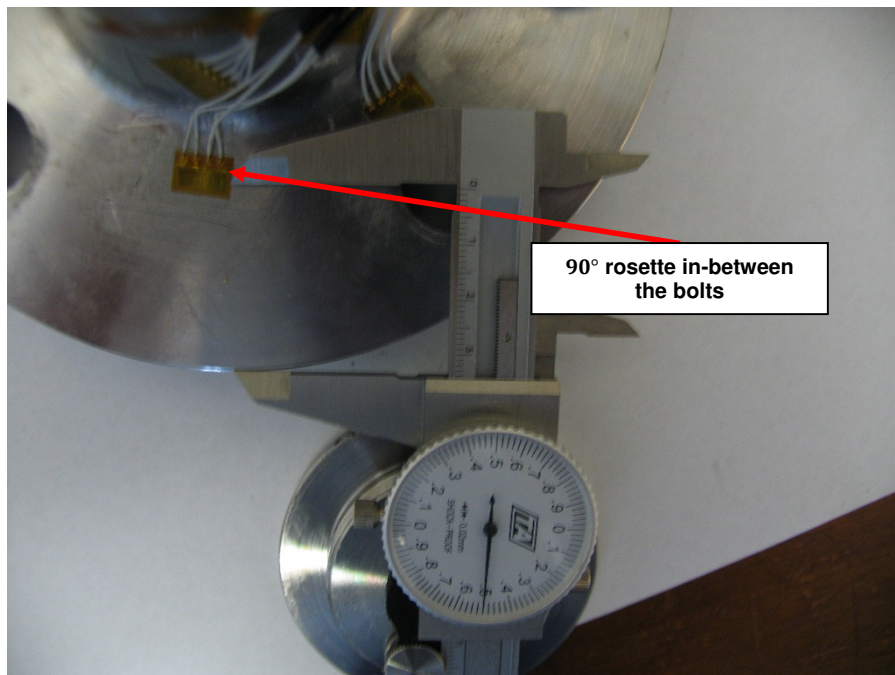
Position, with the perpendicular distance from the edge of the flange, of the 90° rosette in-between the bolts on the ring of the raised face flange with an O-ring groove
